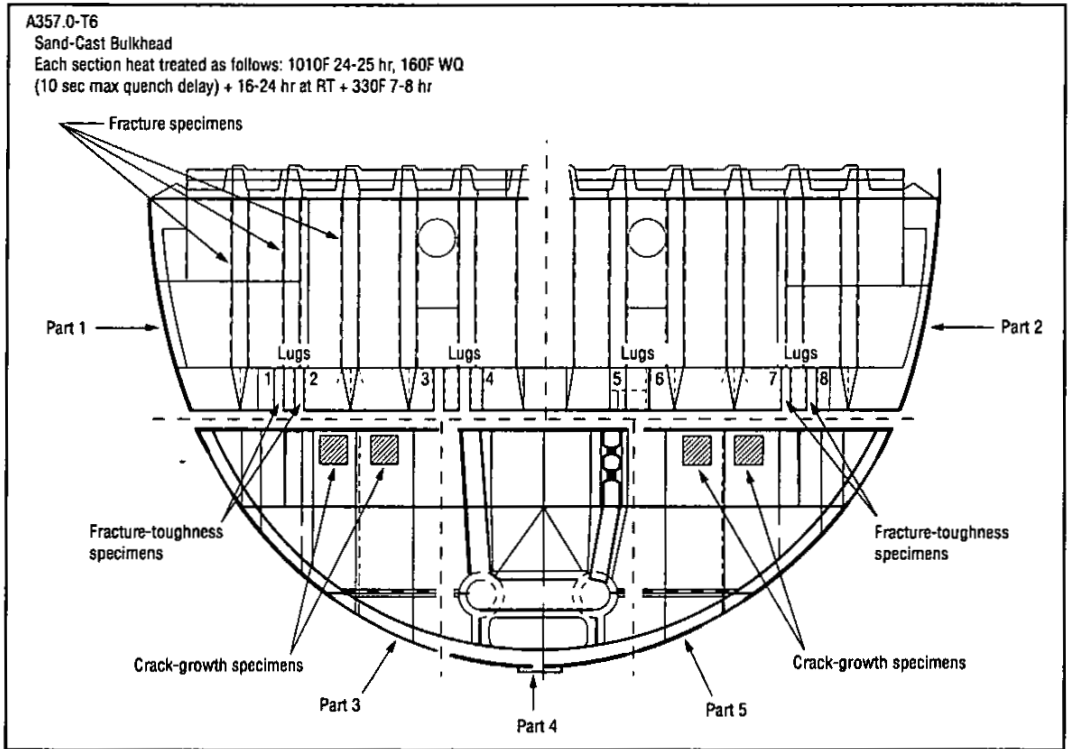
Nose landing-gear support bulkhead casting showing locations of specimens removed from five sections of the casting (Each section heat treated separately) (Ref. 7)
